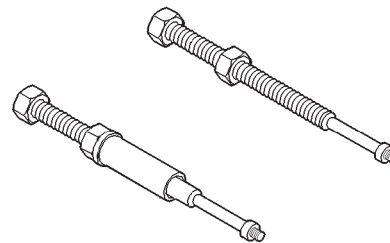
Tool Set-Up For Installing Flex Joint Roll Pin SPECIFICATIONS
